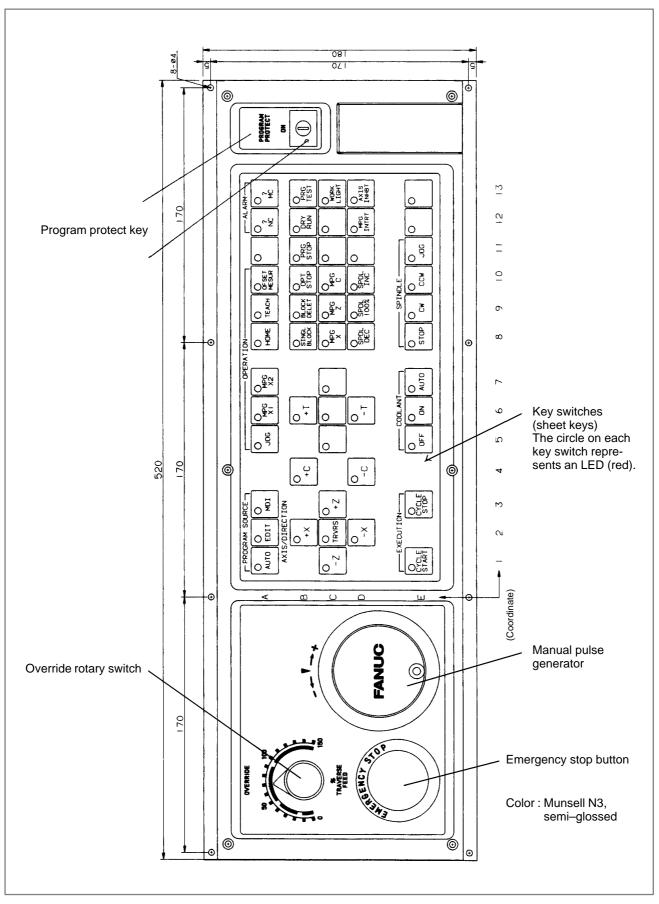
(c) Front view of machine operator's panel for standard unit (T series)
